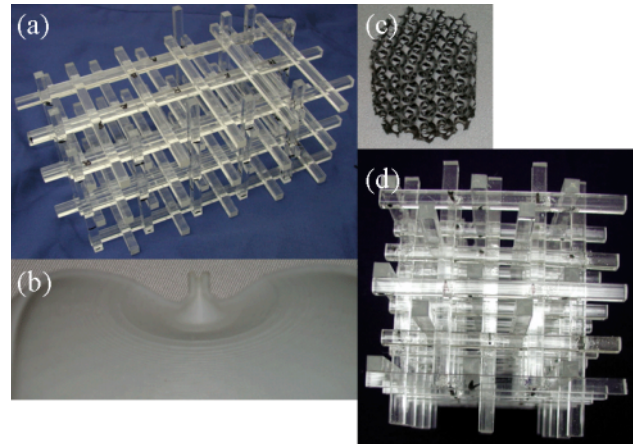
Photographs show small prototypes of macrolattice components: (a) shows the first assembled macrolattice, (b) shows a rapid prototyped liner detail with cutaway into the tank boss inlet, (c) shows a sintered metal macrolattice built for an unknown purpose at LLNL before 1980, and (d) shows assembly alignment defects in the end view of (a) that demanded improved tooling.
